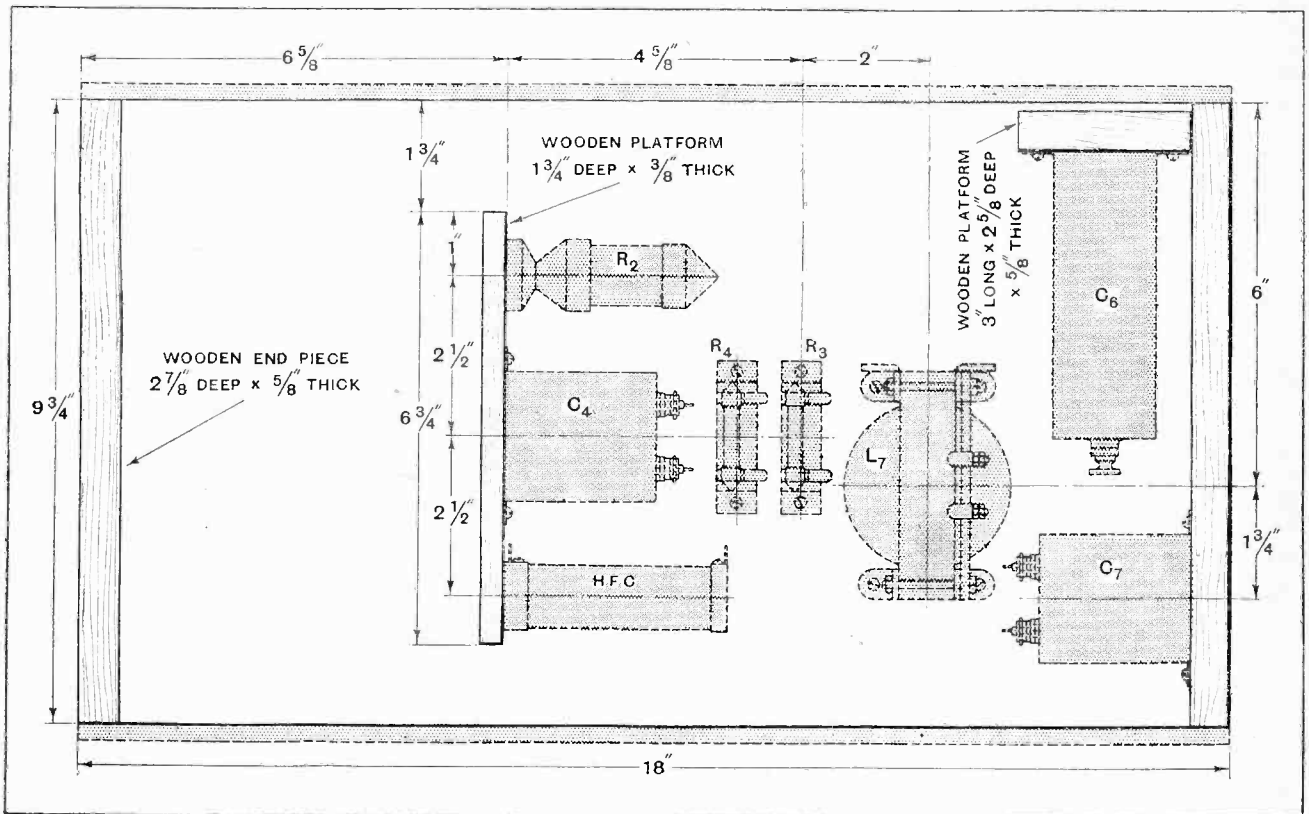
Arrangement of parts on the under side of the baseboard.
